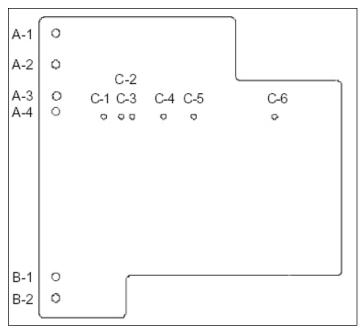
Front view of closure tool showing mounting/testing locations (6352C49H01).
